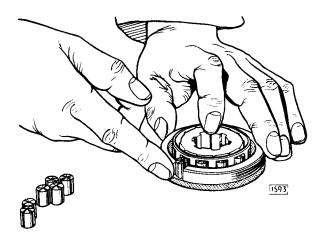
Assembling the uni-directional clutch using Tool No. L.178
